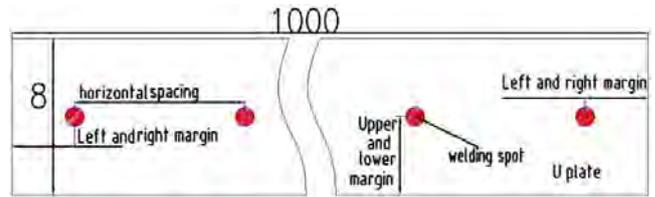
FIGURE IV. SINGLE ROW SOLDER JOINT ARRANGEMENT
